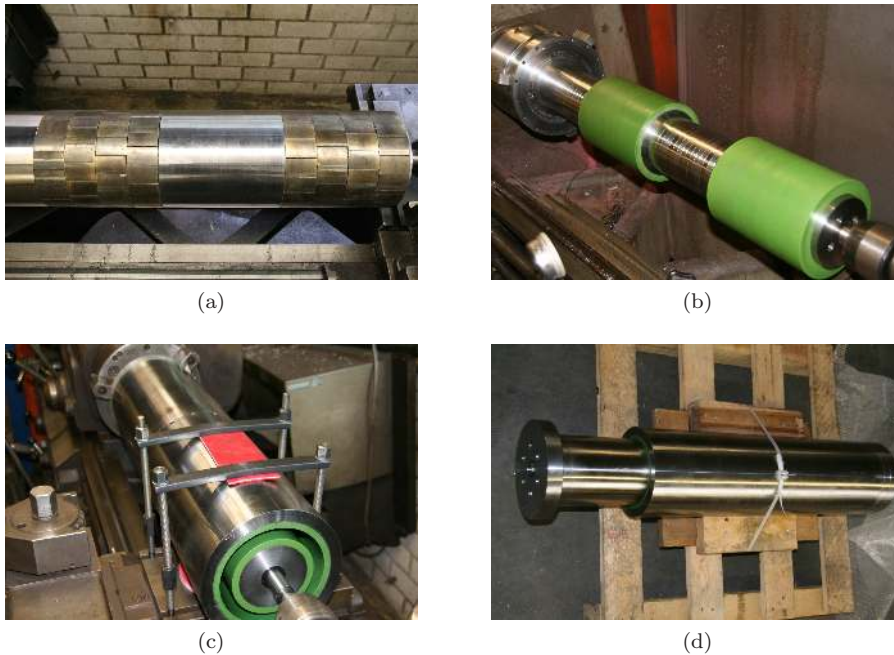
ELMASP prototype during the manufacturing process: (a) translator with segment magnets, (b) inner stator with sliding bearing, (c) assembled stator, and (d) assembled actuator.
